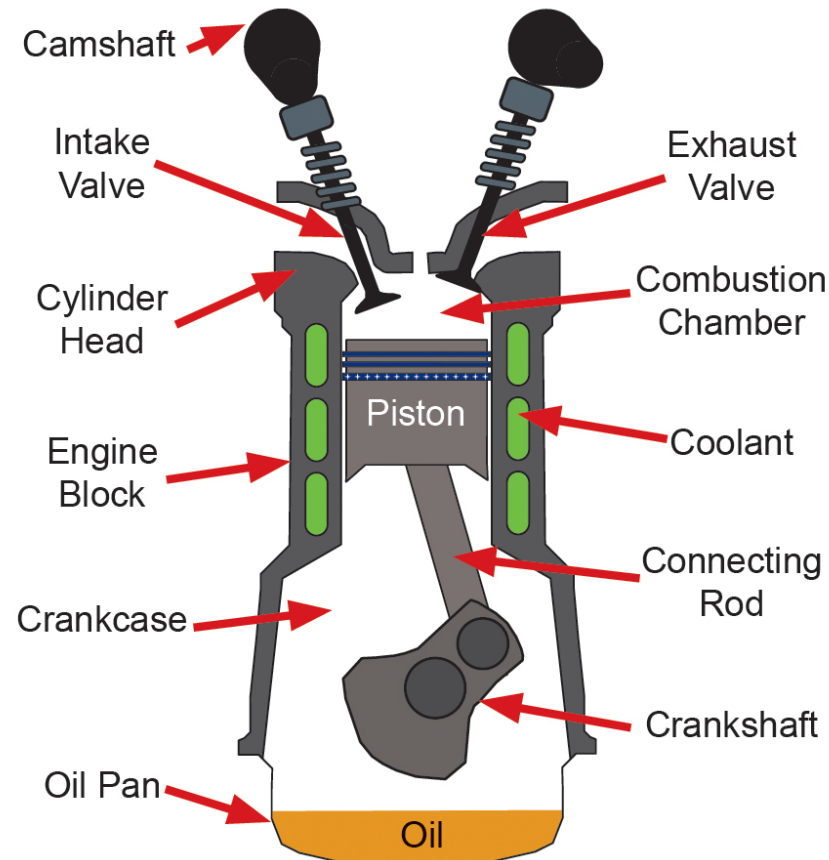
Dual Overhead Camshaft (DOHC) Engine
